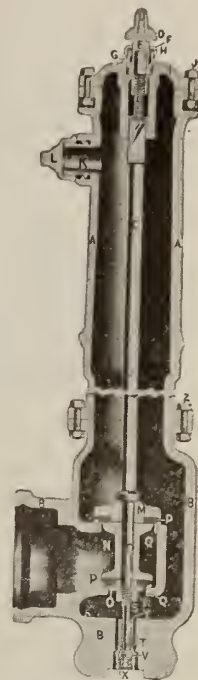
LUDLOW FIRE HYDRANT WITH BALANCED VALVE Showing main valve and drip valve
